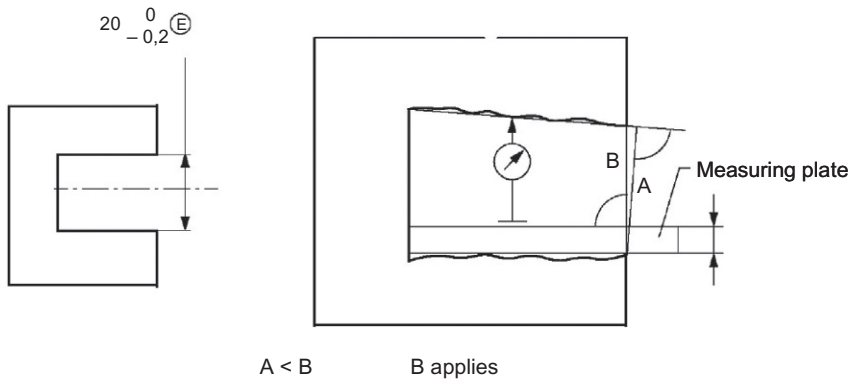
Inspection of the envelope requirement of a plane-pair with a measuring plate (e.g. gauge block) and a length measuring instrument: $A < B$, larger value B) applies
